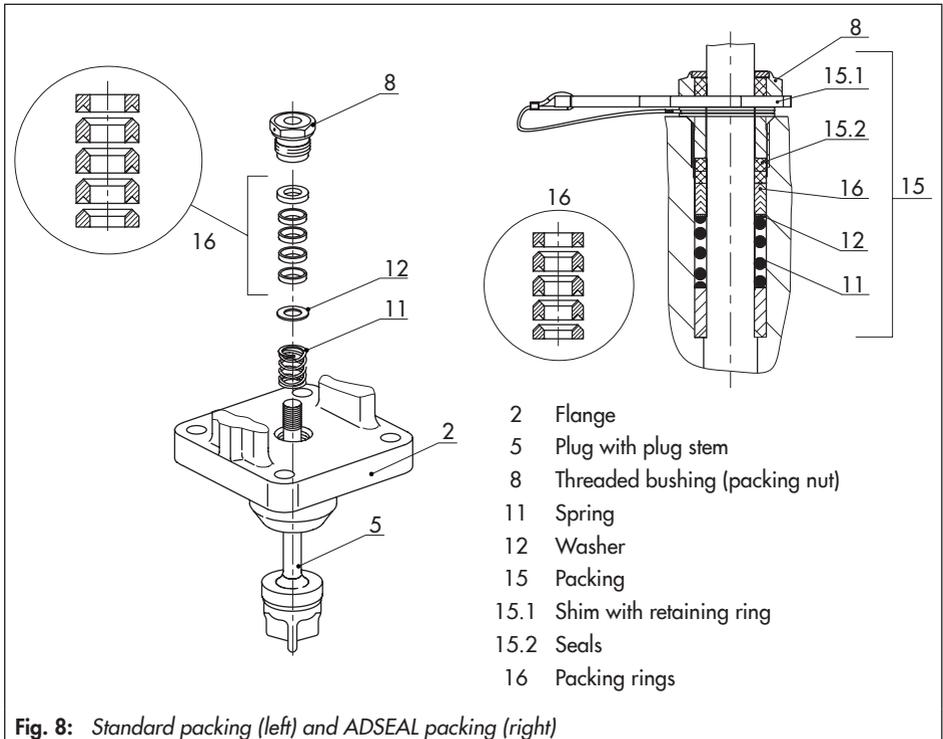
Standard packing (left) and ADSEAL packing (right)
